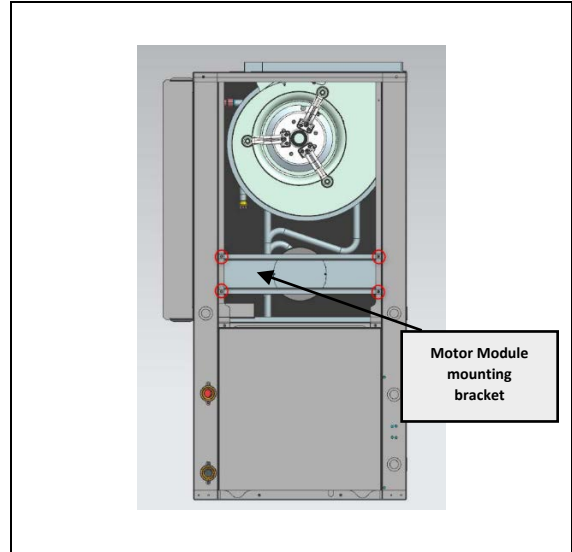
Mounting Bracket Screw Locations (vertical unit configuration shown)
